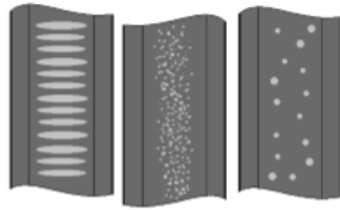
Effects of shaft currents on bearings track surfaces (fluting, frosting, pitting).
